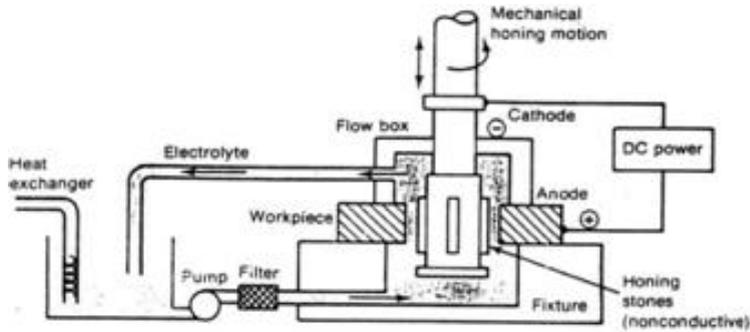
Schematic view of ECH tool with Work piece Interaction.
